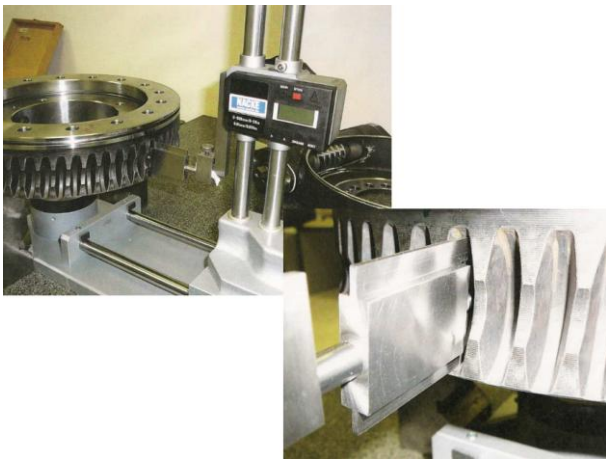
Globoid measurements gears against clamping the front of the assembled
